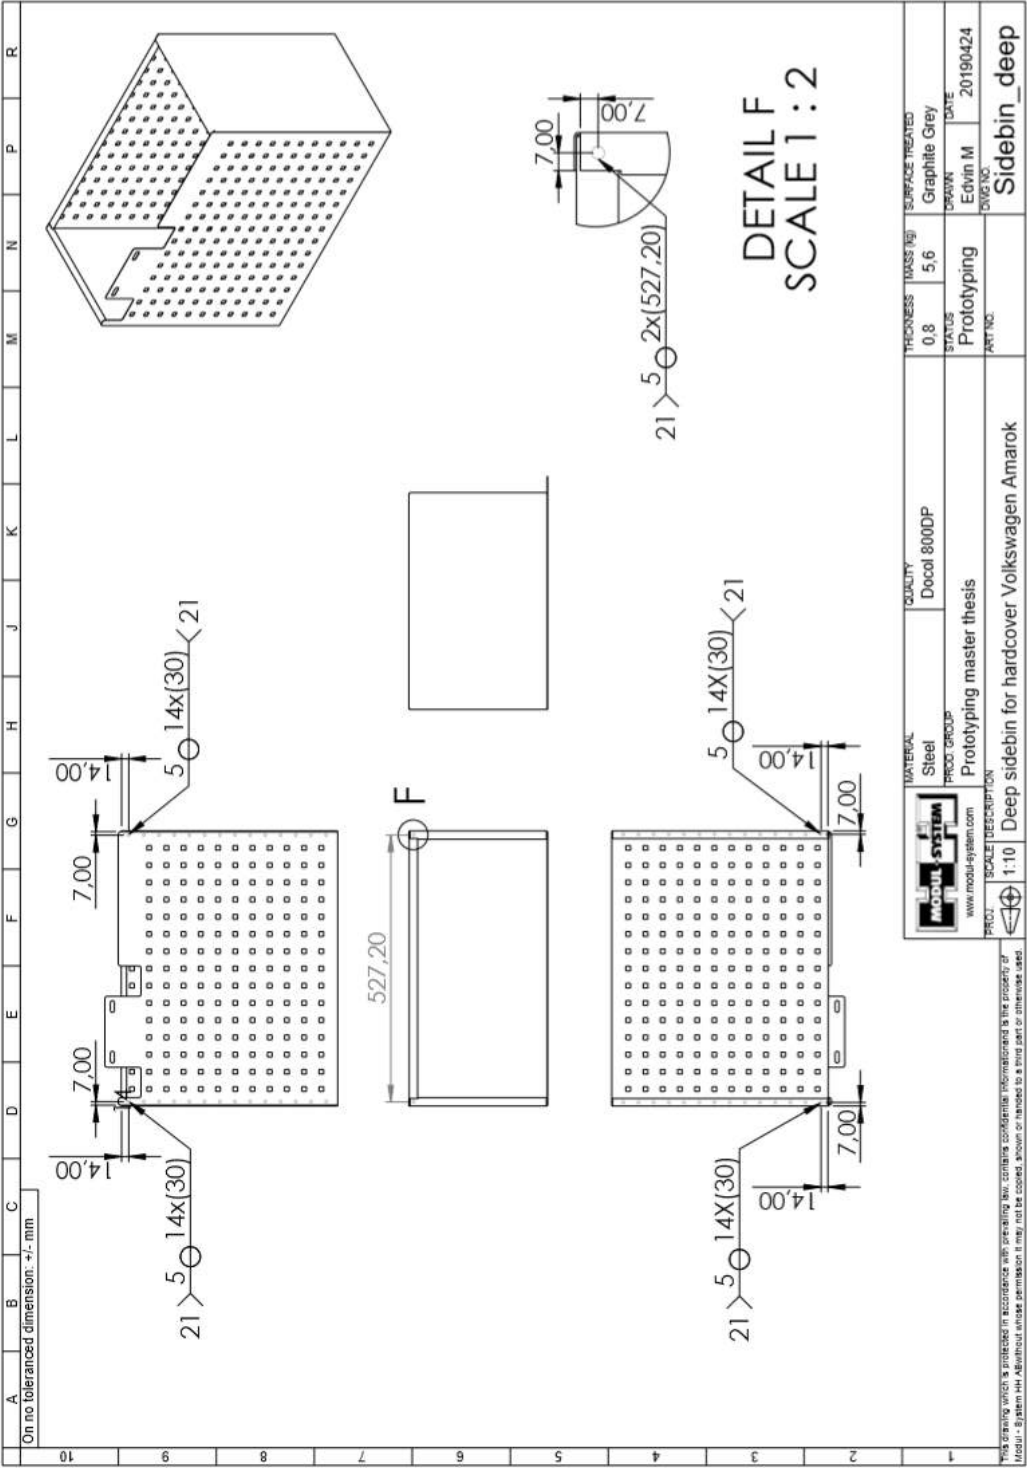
Weld drawing of the deep Storage Compartment.
